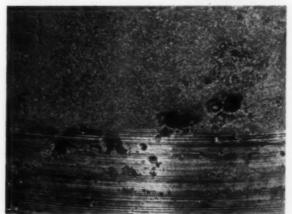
Partially machined surface of nickel casting poured in magnesia-coated graphite mold. The pinhole defects extend 1/2 in. beneath surface and occurred in magnesia-coated graphite molds. Cause of defect believed to be moisture retained in mold coating or picked up by coating subsequent to firing. Photo approx. 2x.
